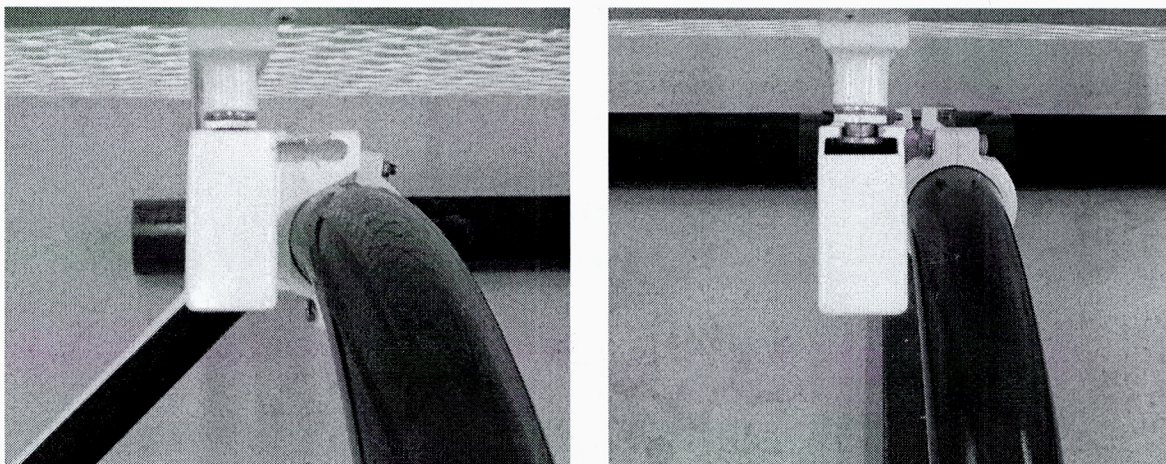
Beam Adjustment, Step 1 – Shim Rear Beam
